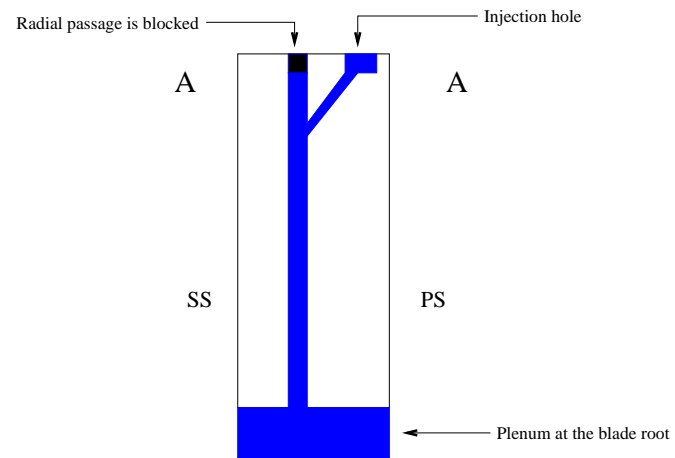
Schematic of the cooling holes inside the turbine blade
